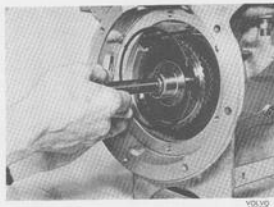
Installation sequence, front clutch snap ring, input shaft and thrust washer
